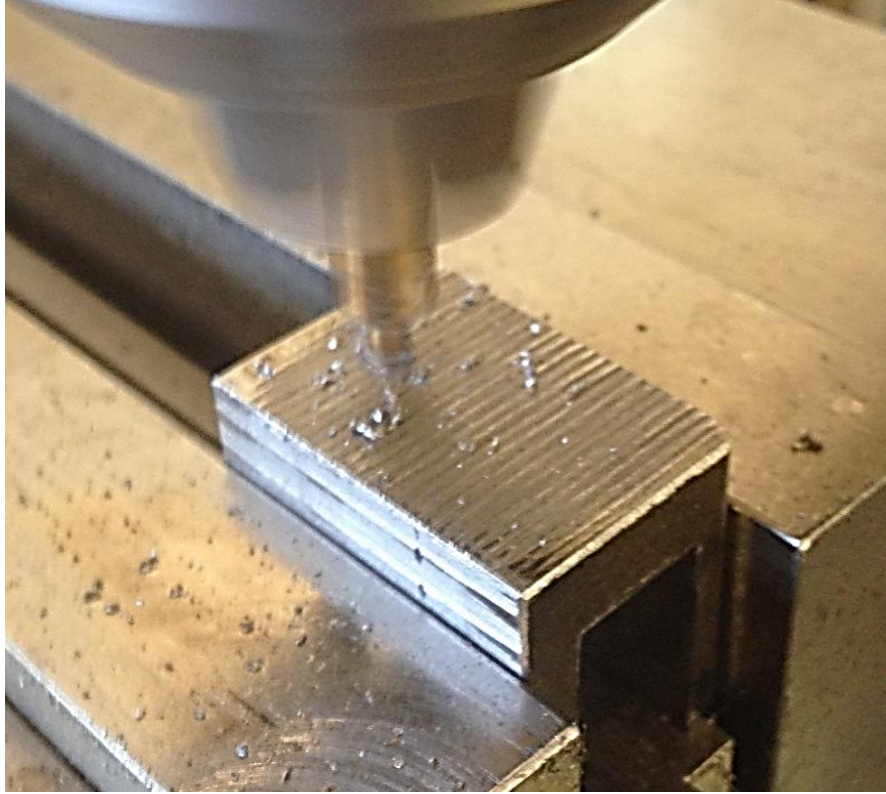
CENTER DRILLING DAMPER BRACKET
